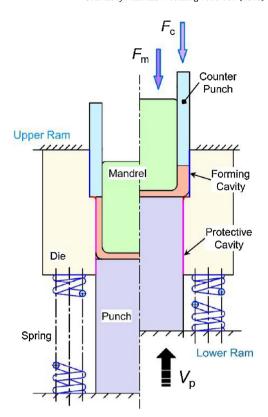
Sheet-bulk forming of cup sidewall with controllable deformation zone.
